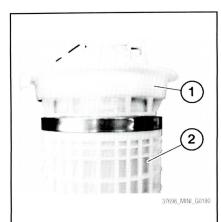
Release cap (1) on fuel filter housing (2) by one turn counterclockwise (bayonet lock).
